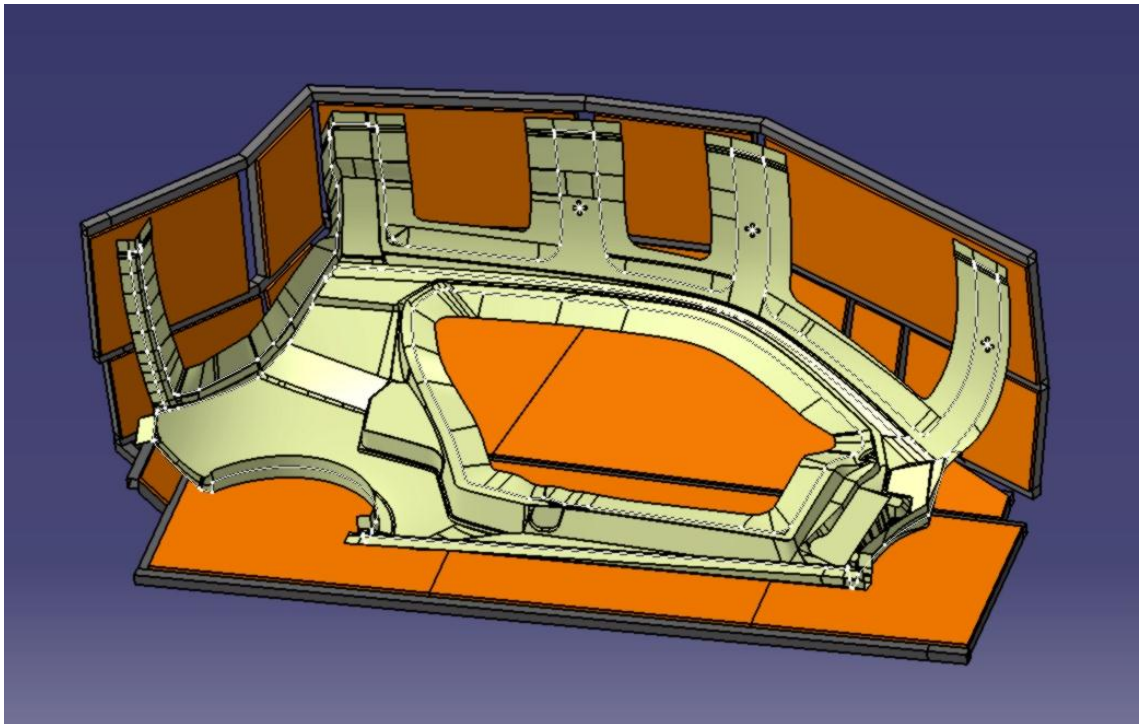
Side panel, with the cutting lines and the calibration points, inside the frame
